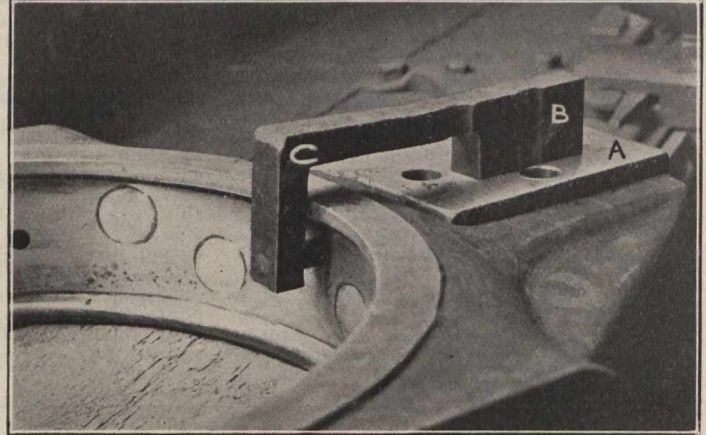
Jig for Drilling Holes for Eccentric Rod Butt.
